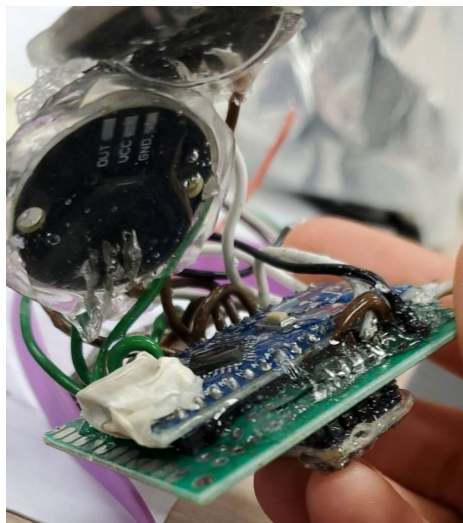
Photo illustrating the potting for the PCB board and the LED component
